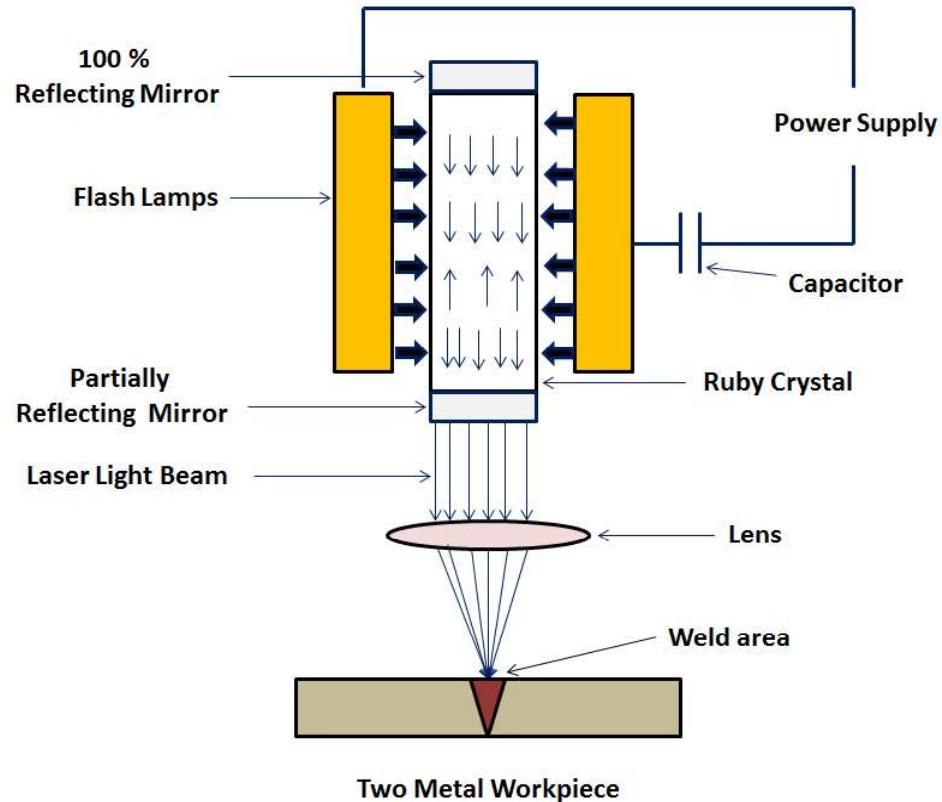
Schematic diagram of laser beam welding system
